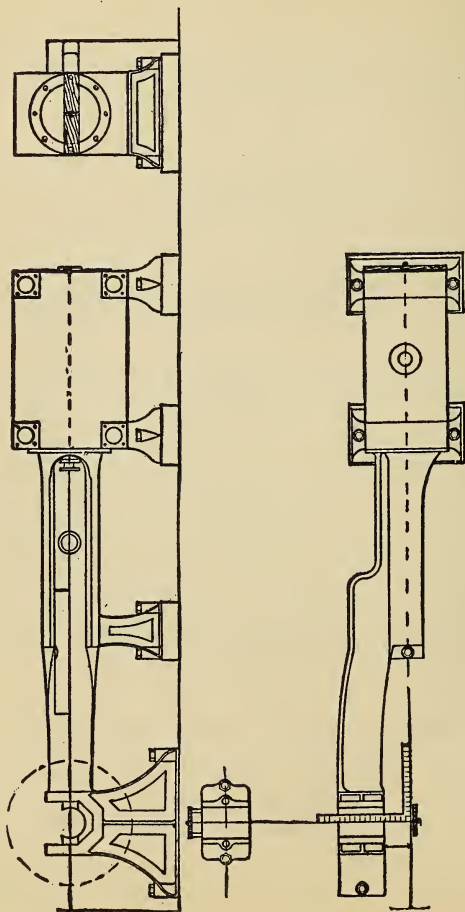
to 72.—Lining up a horizontal engine; views showing method of locating the center lines. In this work the engine and shaft must be level, and the shaft at right angles to the center line of the engine. Lining up an engine requires precision and the exercise of common sense. If the work be not properly done there will be considerable trouble in the operation of the engine.
